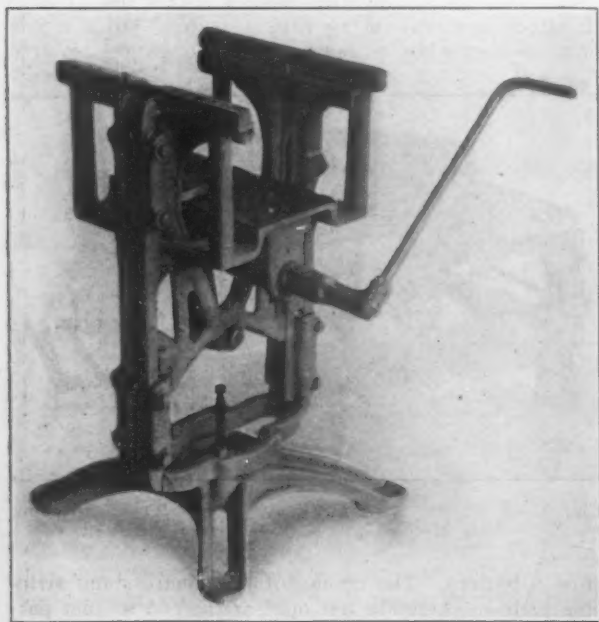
The Type T Molding Machine Built by the Edward A. Pridmore Company, Chicago, Ill.
